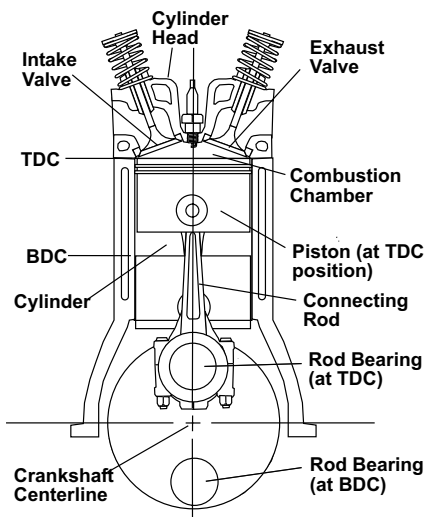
Major operating components of the reciprocating-piston internal-combustion engine. TDC, top dead center; BDC, bottom dead center
